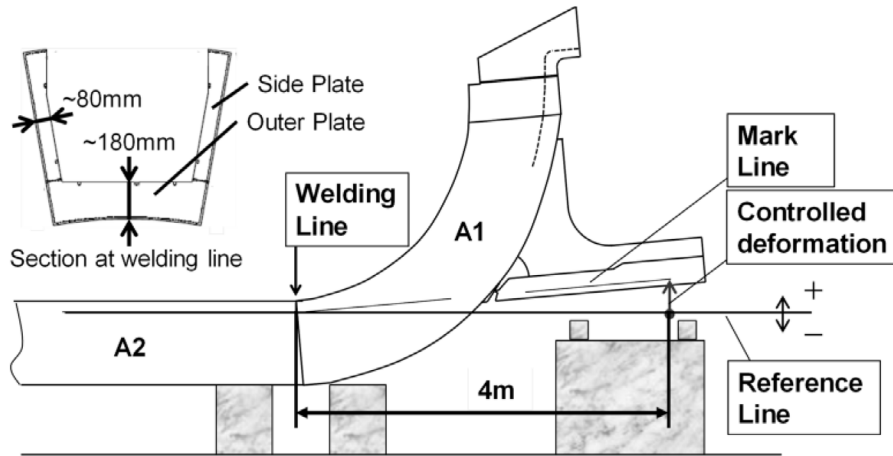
Segment-to-segment welding (A1-A2).
